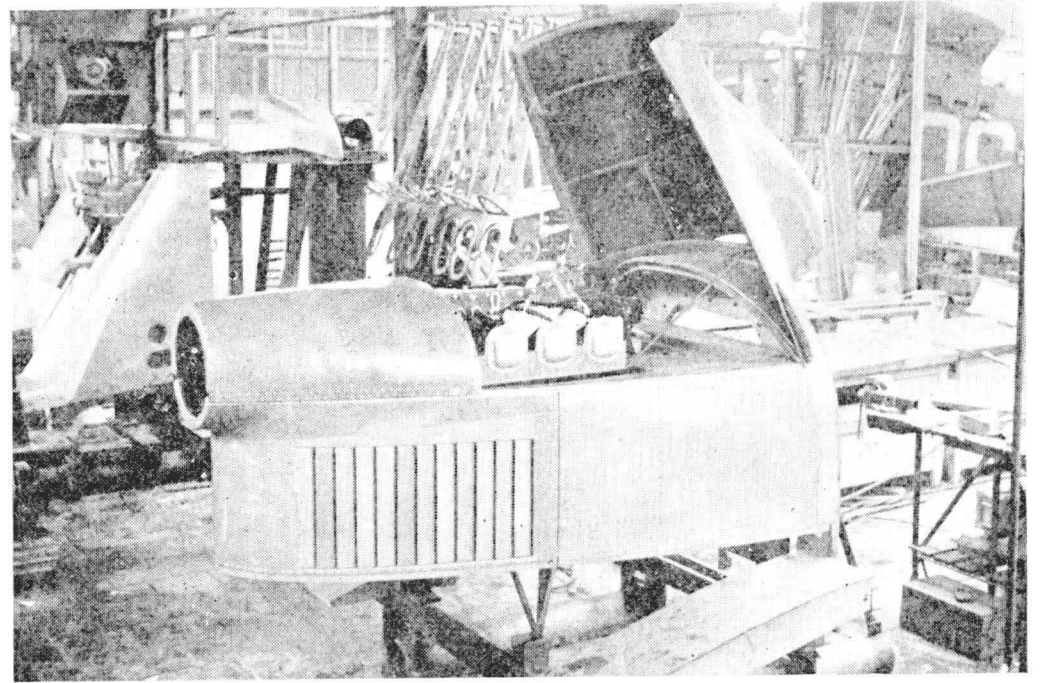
The power plant is an exceptionally neat and compact unit. The engine is held by four bolts and the engine mounting is itself attached to the airframe by four bolts. The power unit can be taken complete from this final assembly jig and mounted direct on the airframe
